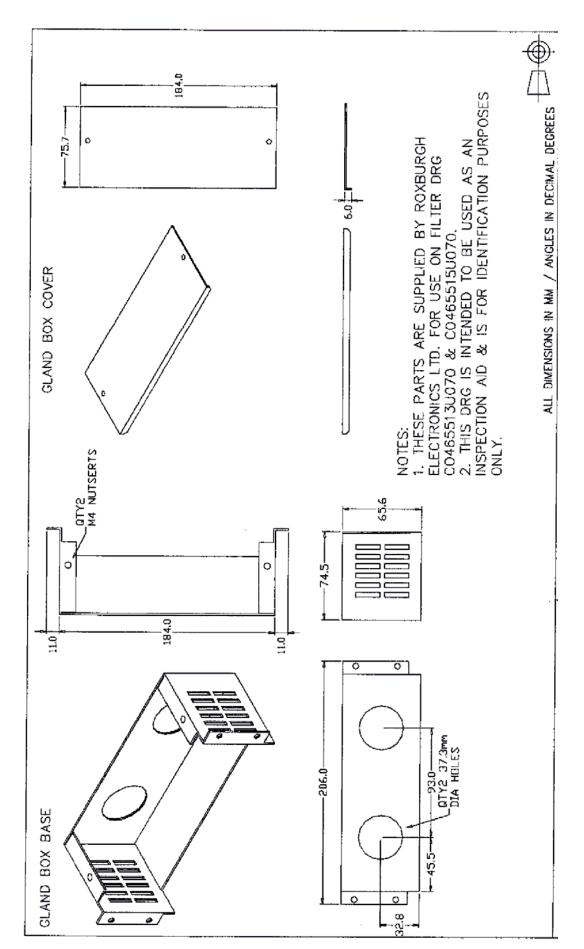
Gland Box for Footprint/Bookcase Mounting Filters (generic)
